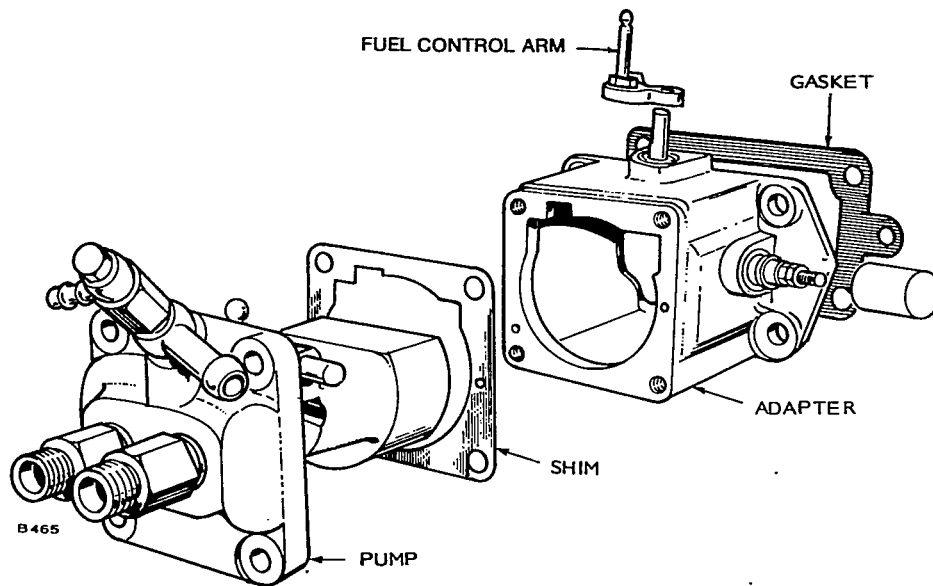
PUMP AND ADAPTER ASSEMBLY
